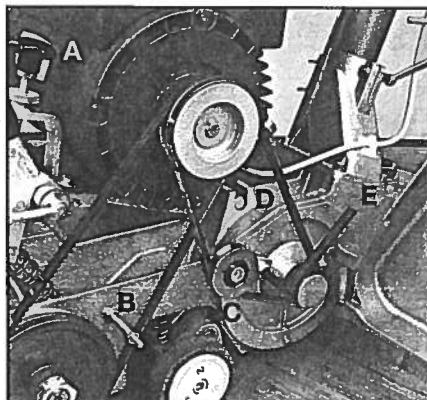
A. Star knob #5.03 B. Drum belt C. V-belt tensioning pulley #74 D. Fan belt E. 10mm Hex wrench
